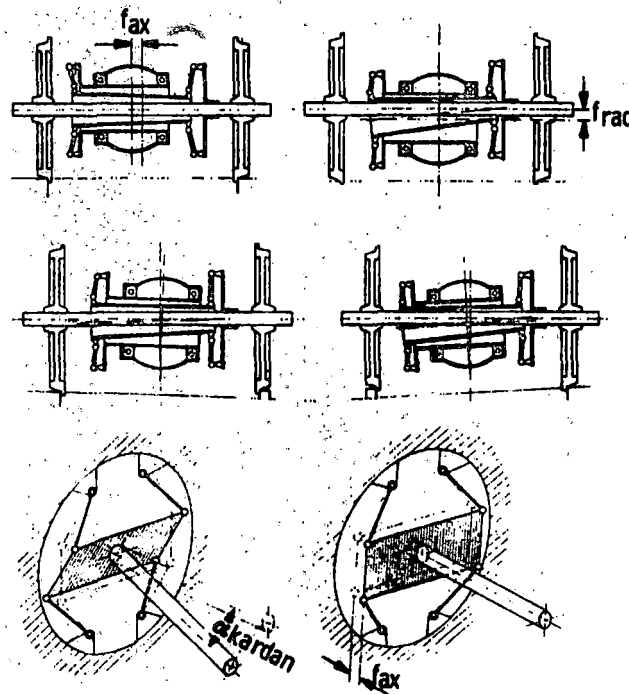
Double-sided Flexible Coupling Axle Deflections
